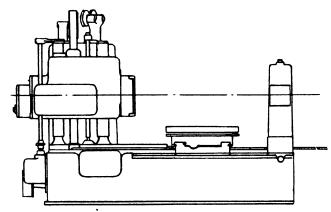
(left).—PLAIN SPINDLE HORI-ZONTAL BORING MACHINE
